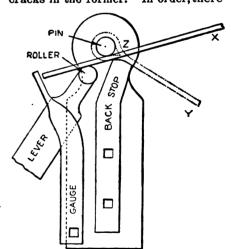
METHOD OF USING EYE-BENDING TOOL.
